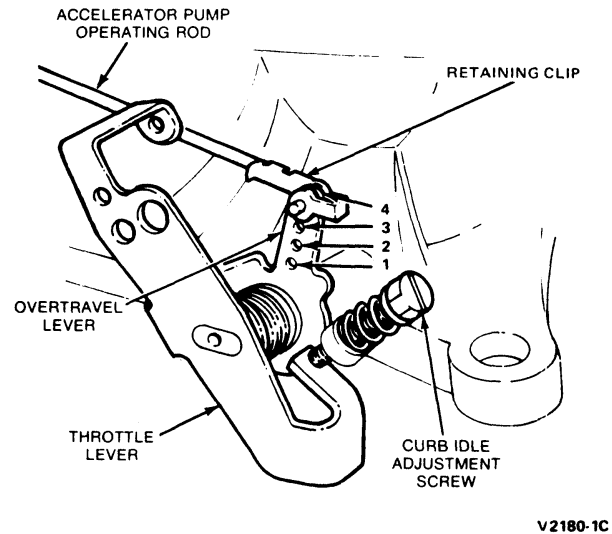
Typical Accelerator Pump Stroke Adjustment
